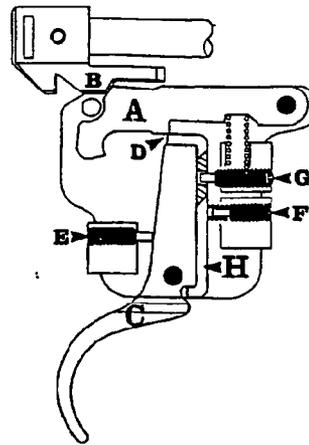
In this commercial override trigger, sear A blocks cocking piece B and is supported by trigger piece C. Engagement of the cocking piece can be large, with sear engagement D small. This trigger is fully adjustable for engagement E, weight F, and overtravel G. Typical weight is two to four pounds, engagement 0.012 inch, overtravel 0.005 inch. Connector strap H between sear A and trigger piece C gives this Remington Model 700 trigger a special "resilient" release, as explained in Rifle 64, page 18.
